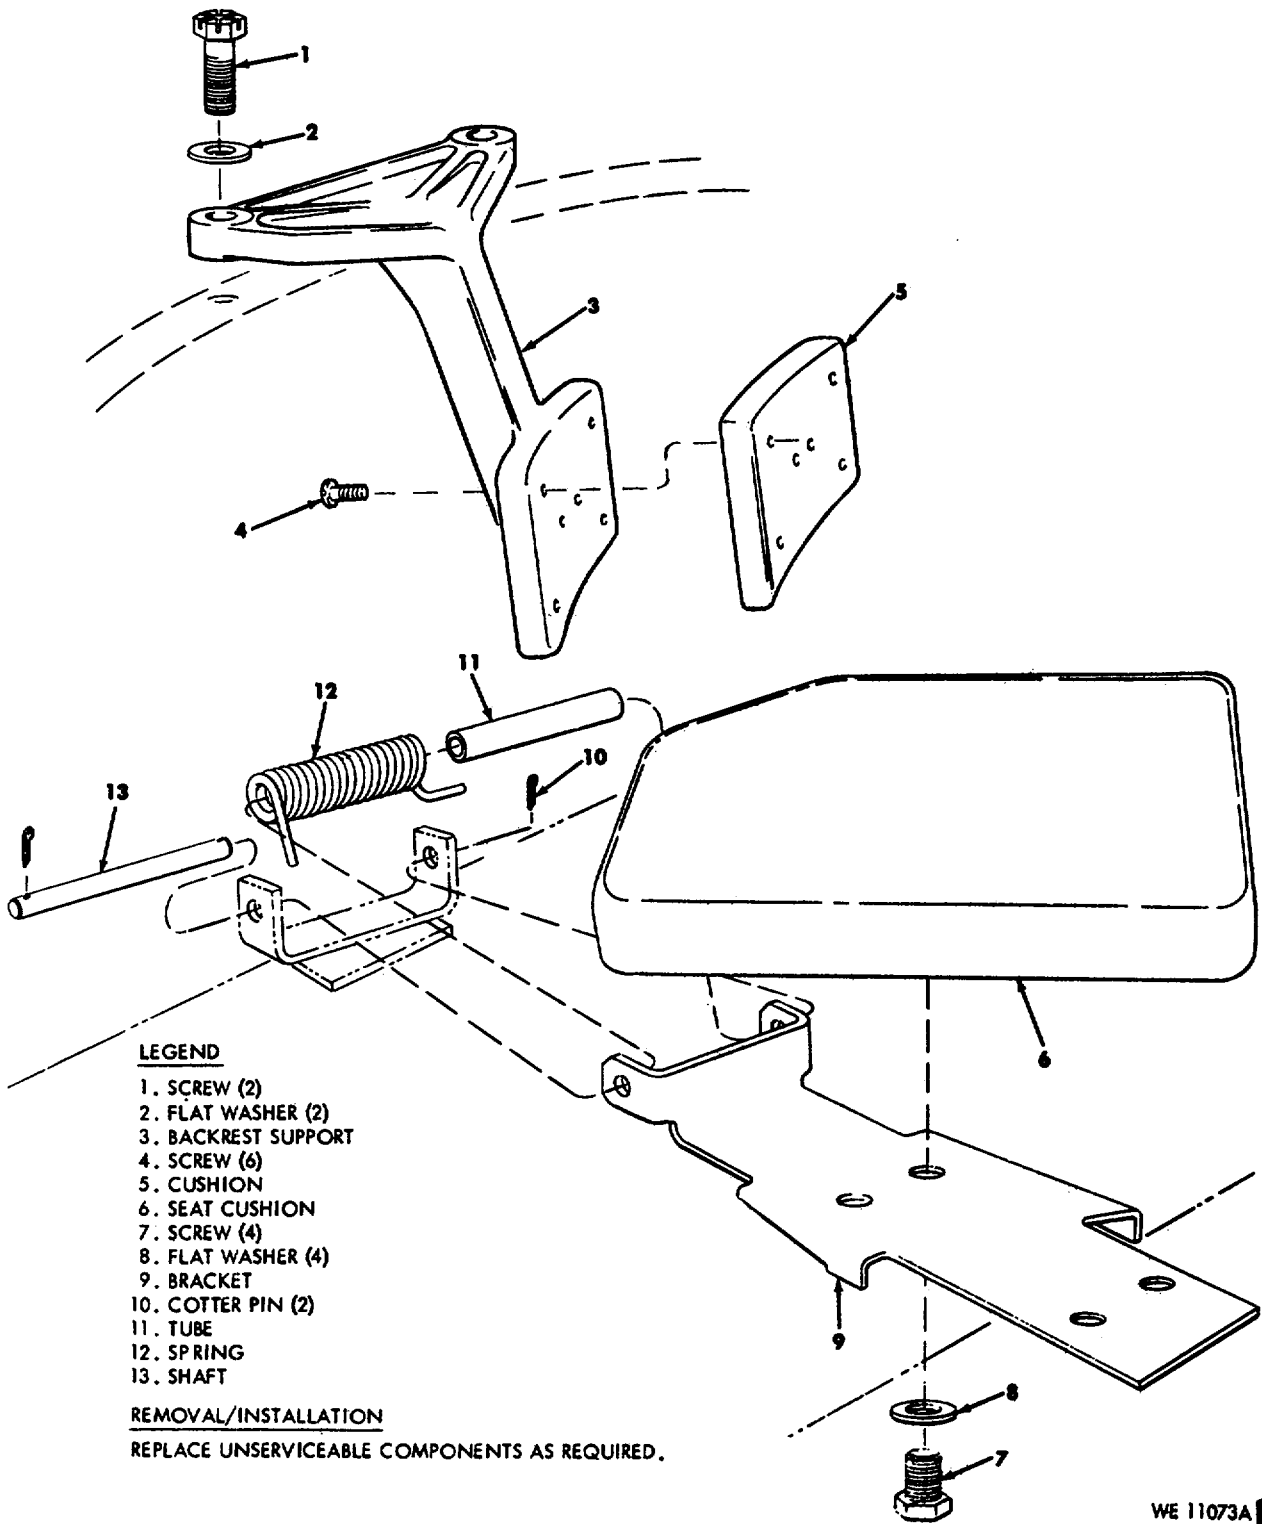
(Superseded) Removal/installation - loader's seat and backrest
